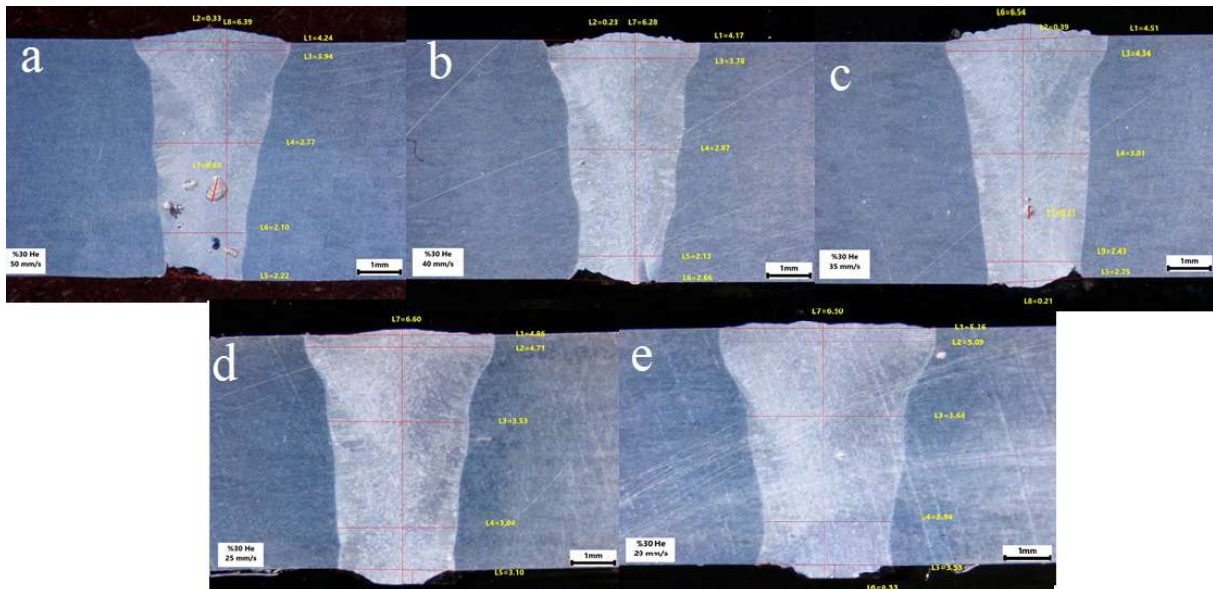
Joints made at different welding speeds a) 50 mm / s b) 40 mm / s, c) 35 mm / s, d) 25 mm / s, e) 20 mm / s
